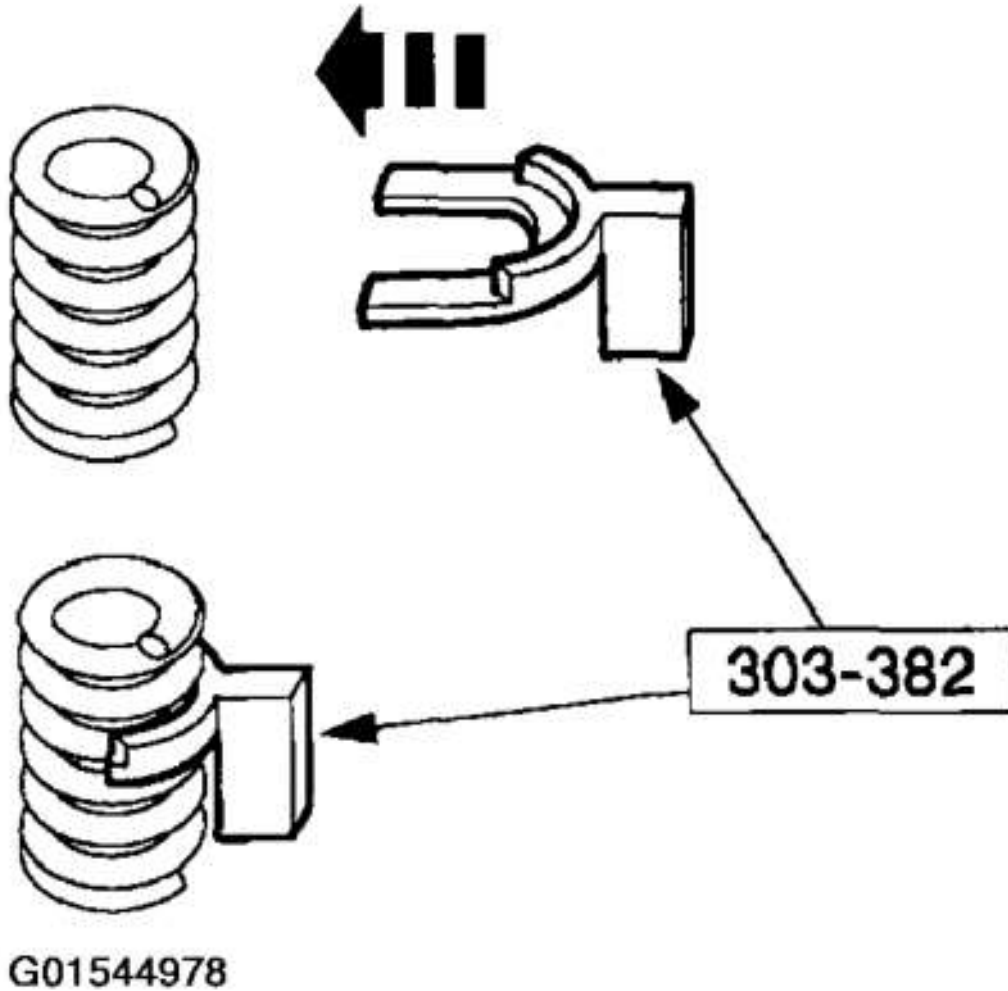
Installing Special Tool Between Valve Spring Coils To Prevent Valve Stem Seal Damage
